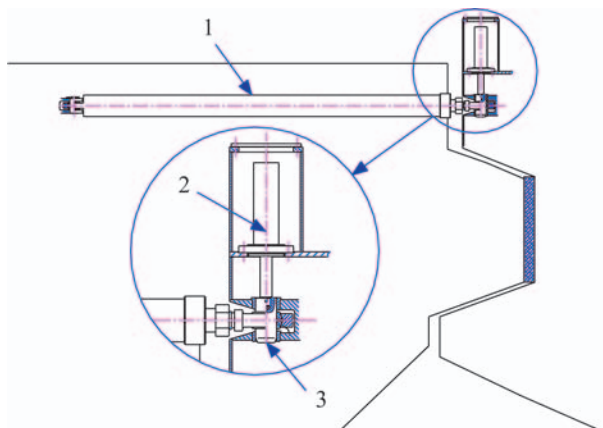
The coupling unit of the ship segments. Notation: 1 - coupling cylinder, 2 - bolt-removing cylinder, 3 - removable bolt of piston-rod eye.
